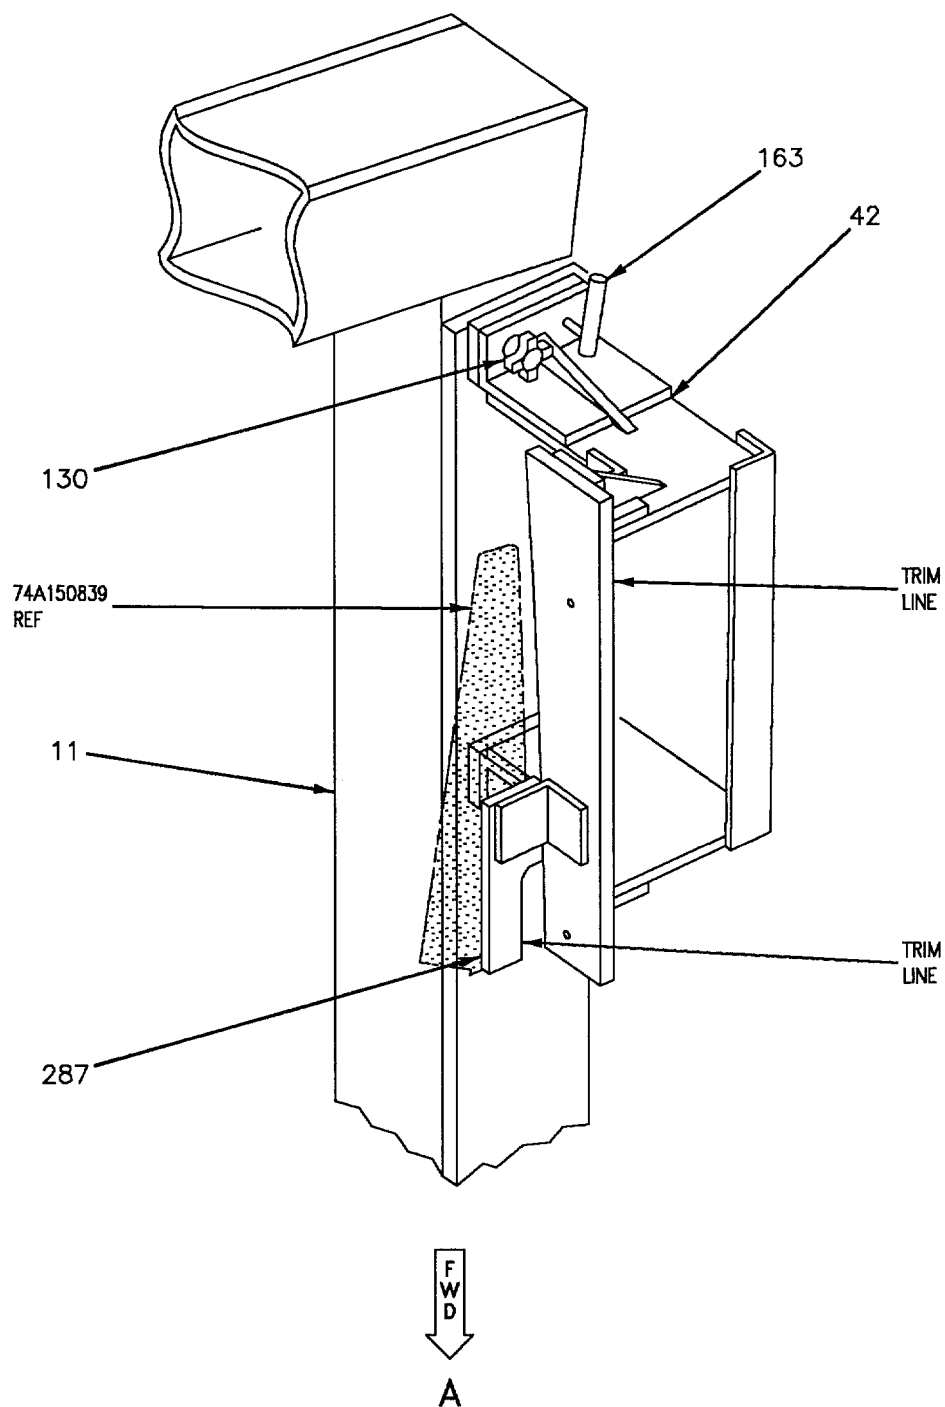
Lower Wing Fold Skin Fairing (Sheet 1)
